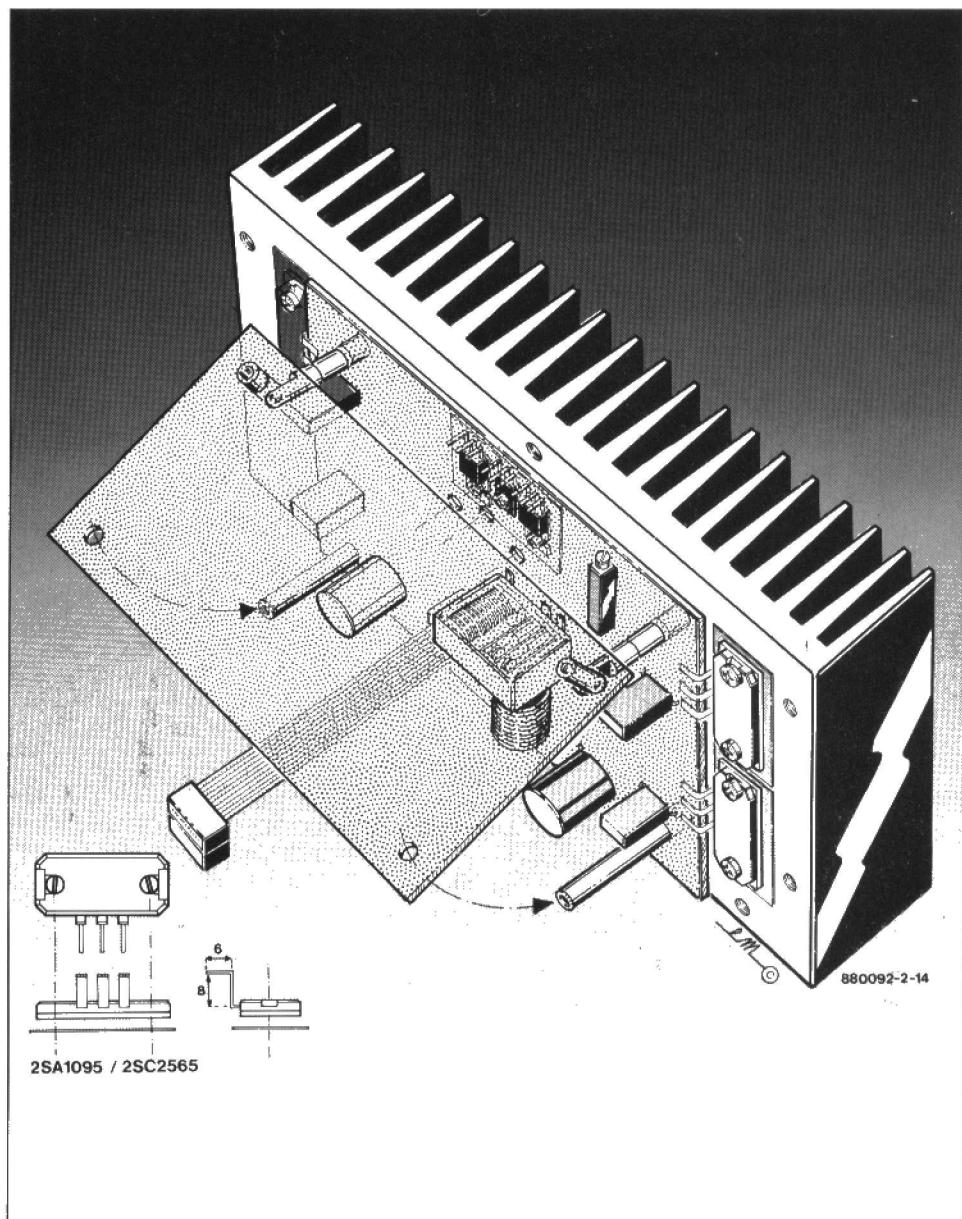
Mounting of the output and driver transistors on the heat sink.
